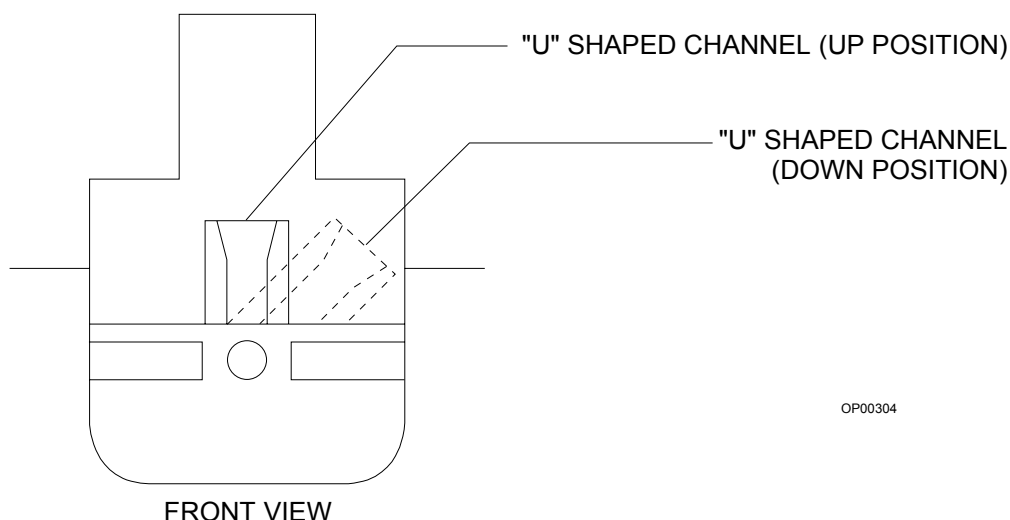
Piston Coupling Assembly - “U” Shaped Channel
